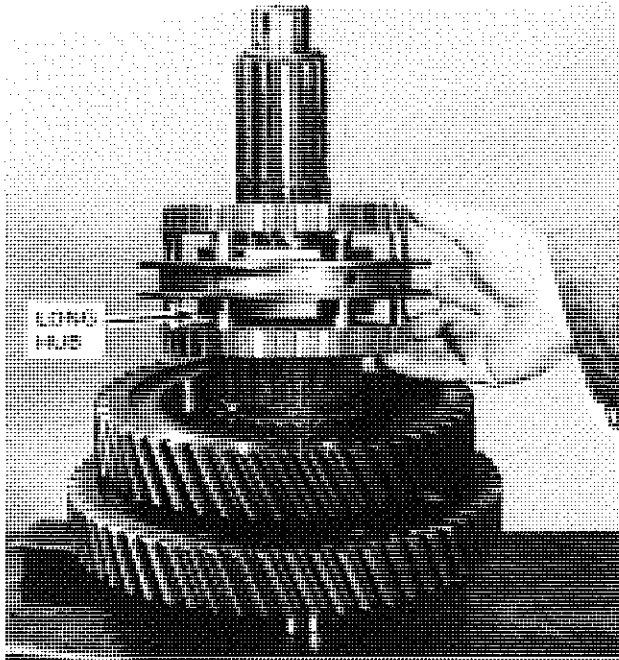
Assembling 2nd-3rd Speed Synchronizer
